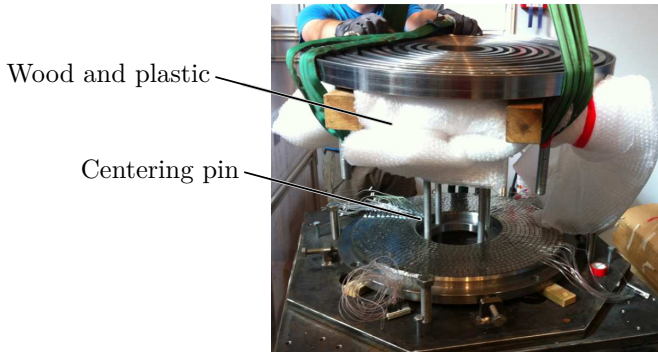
Final step of the assembly of the PMTB in Uppsala University [111] with centering pins and non-magnetic protection.
